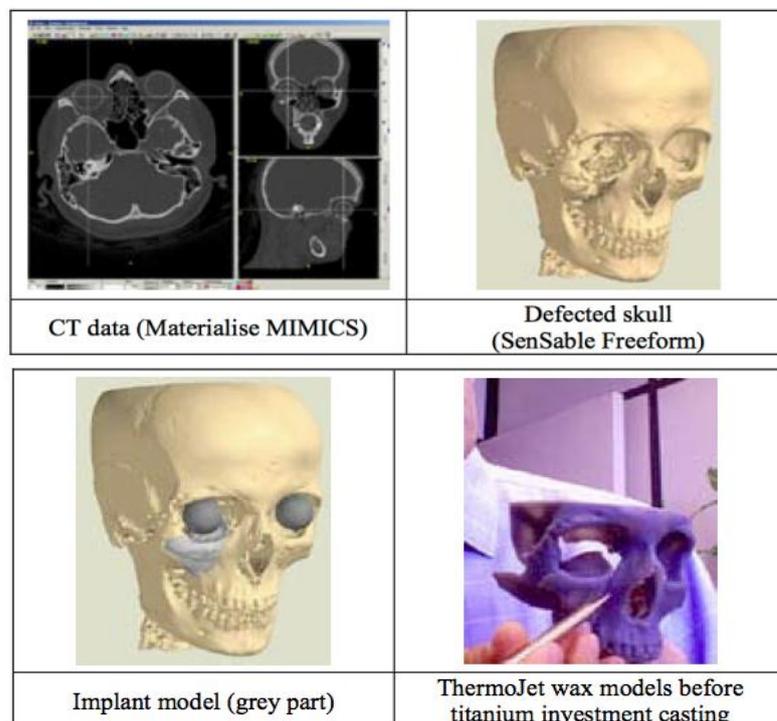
Reconstruction of the defected part by AM and investment casting (Negis 2009)
